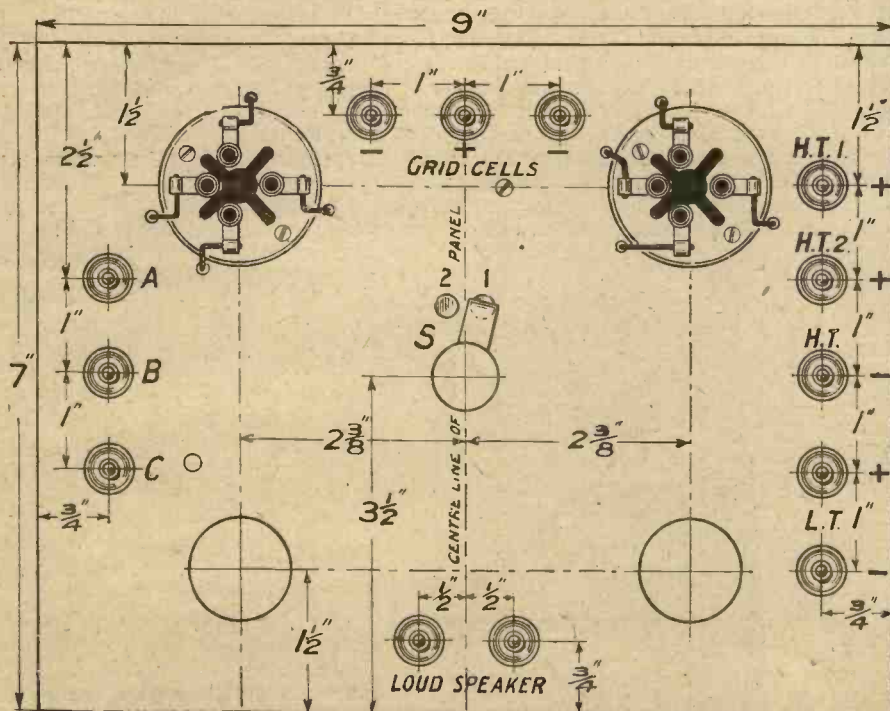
This drawing, which is exactly half size, shows the positions of the parts. Full size Blueprint No. C1010A may be obtained.
